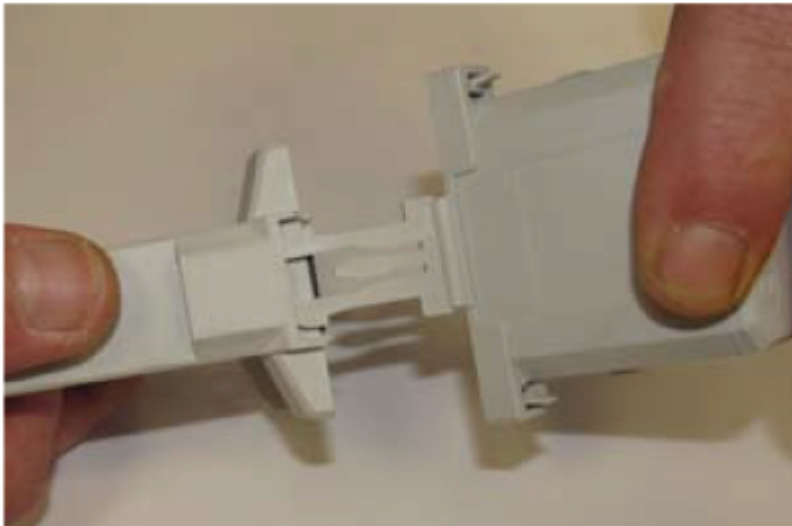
With the SCT67xx types, the lower half of the core can be removed for easier mounting.
